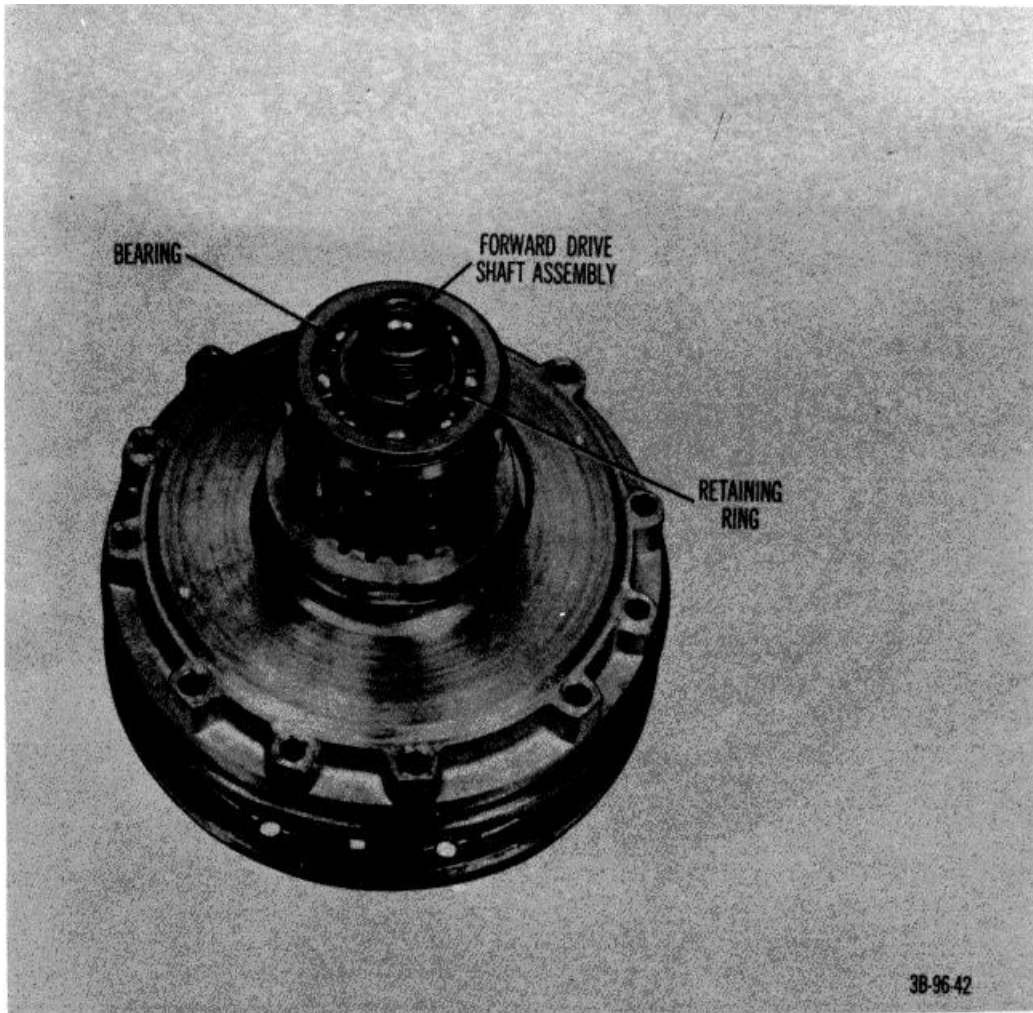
Bearing and retaining ring installed on forward drive shaft.
